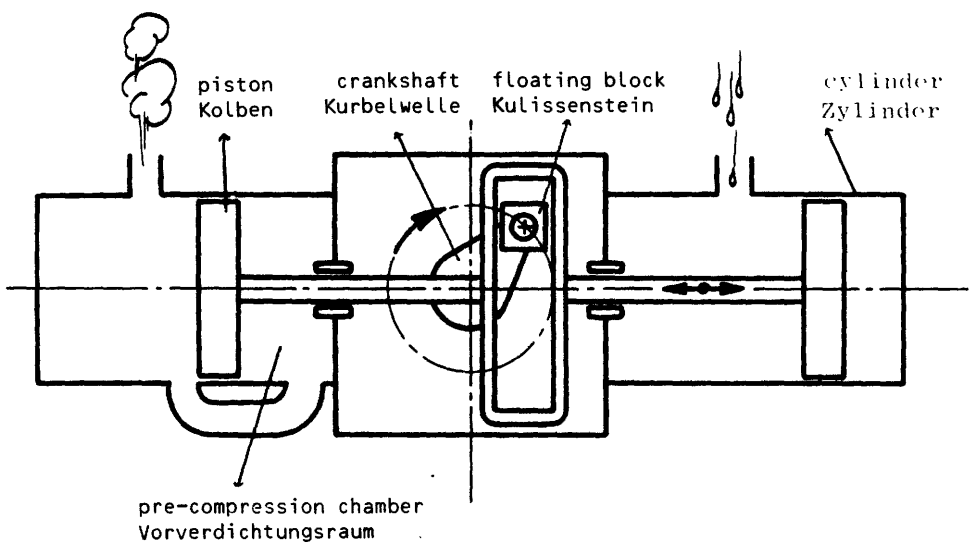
Principle of the two-cylinder two-stroke internal combustion engine.
